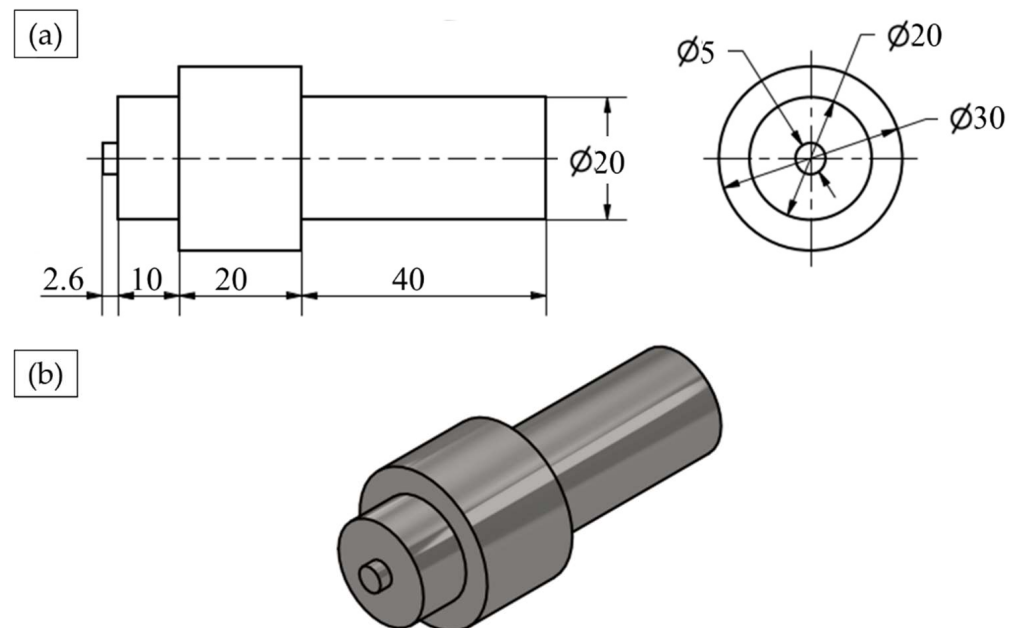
(a) Schematic of welding tool (all dimensions in mm) and (b) isometric view of designed FSSW tool.
